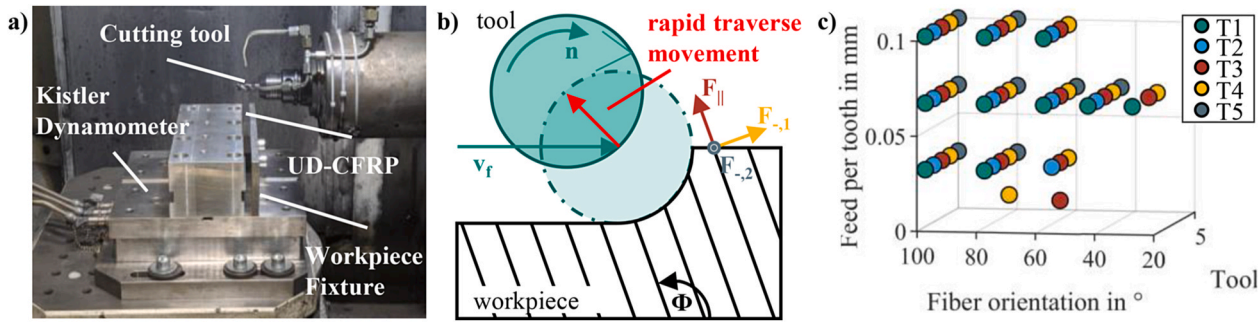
Experimental procedure with a) the experimental setup in Heller MC 16 machining centre, b) the milling path and c) the experimental design.
